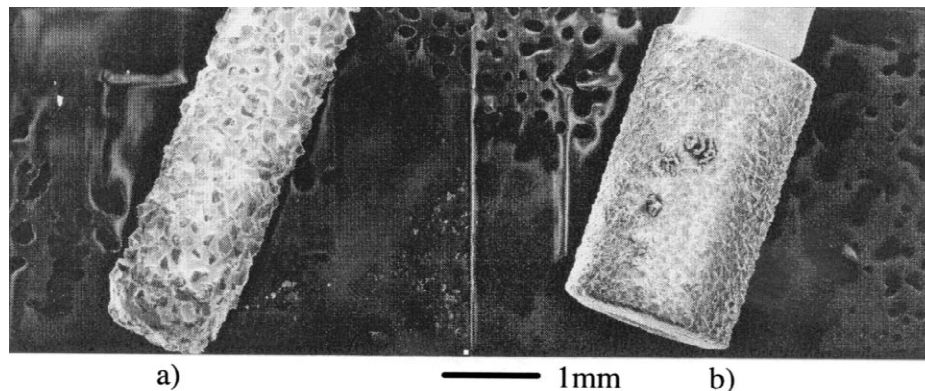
Comparison between cylindrical conventional burr (a) and CVD diamond burr (b) after drilling test.
